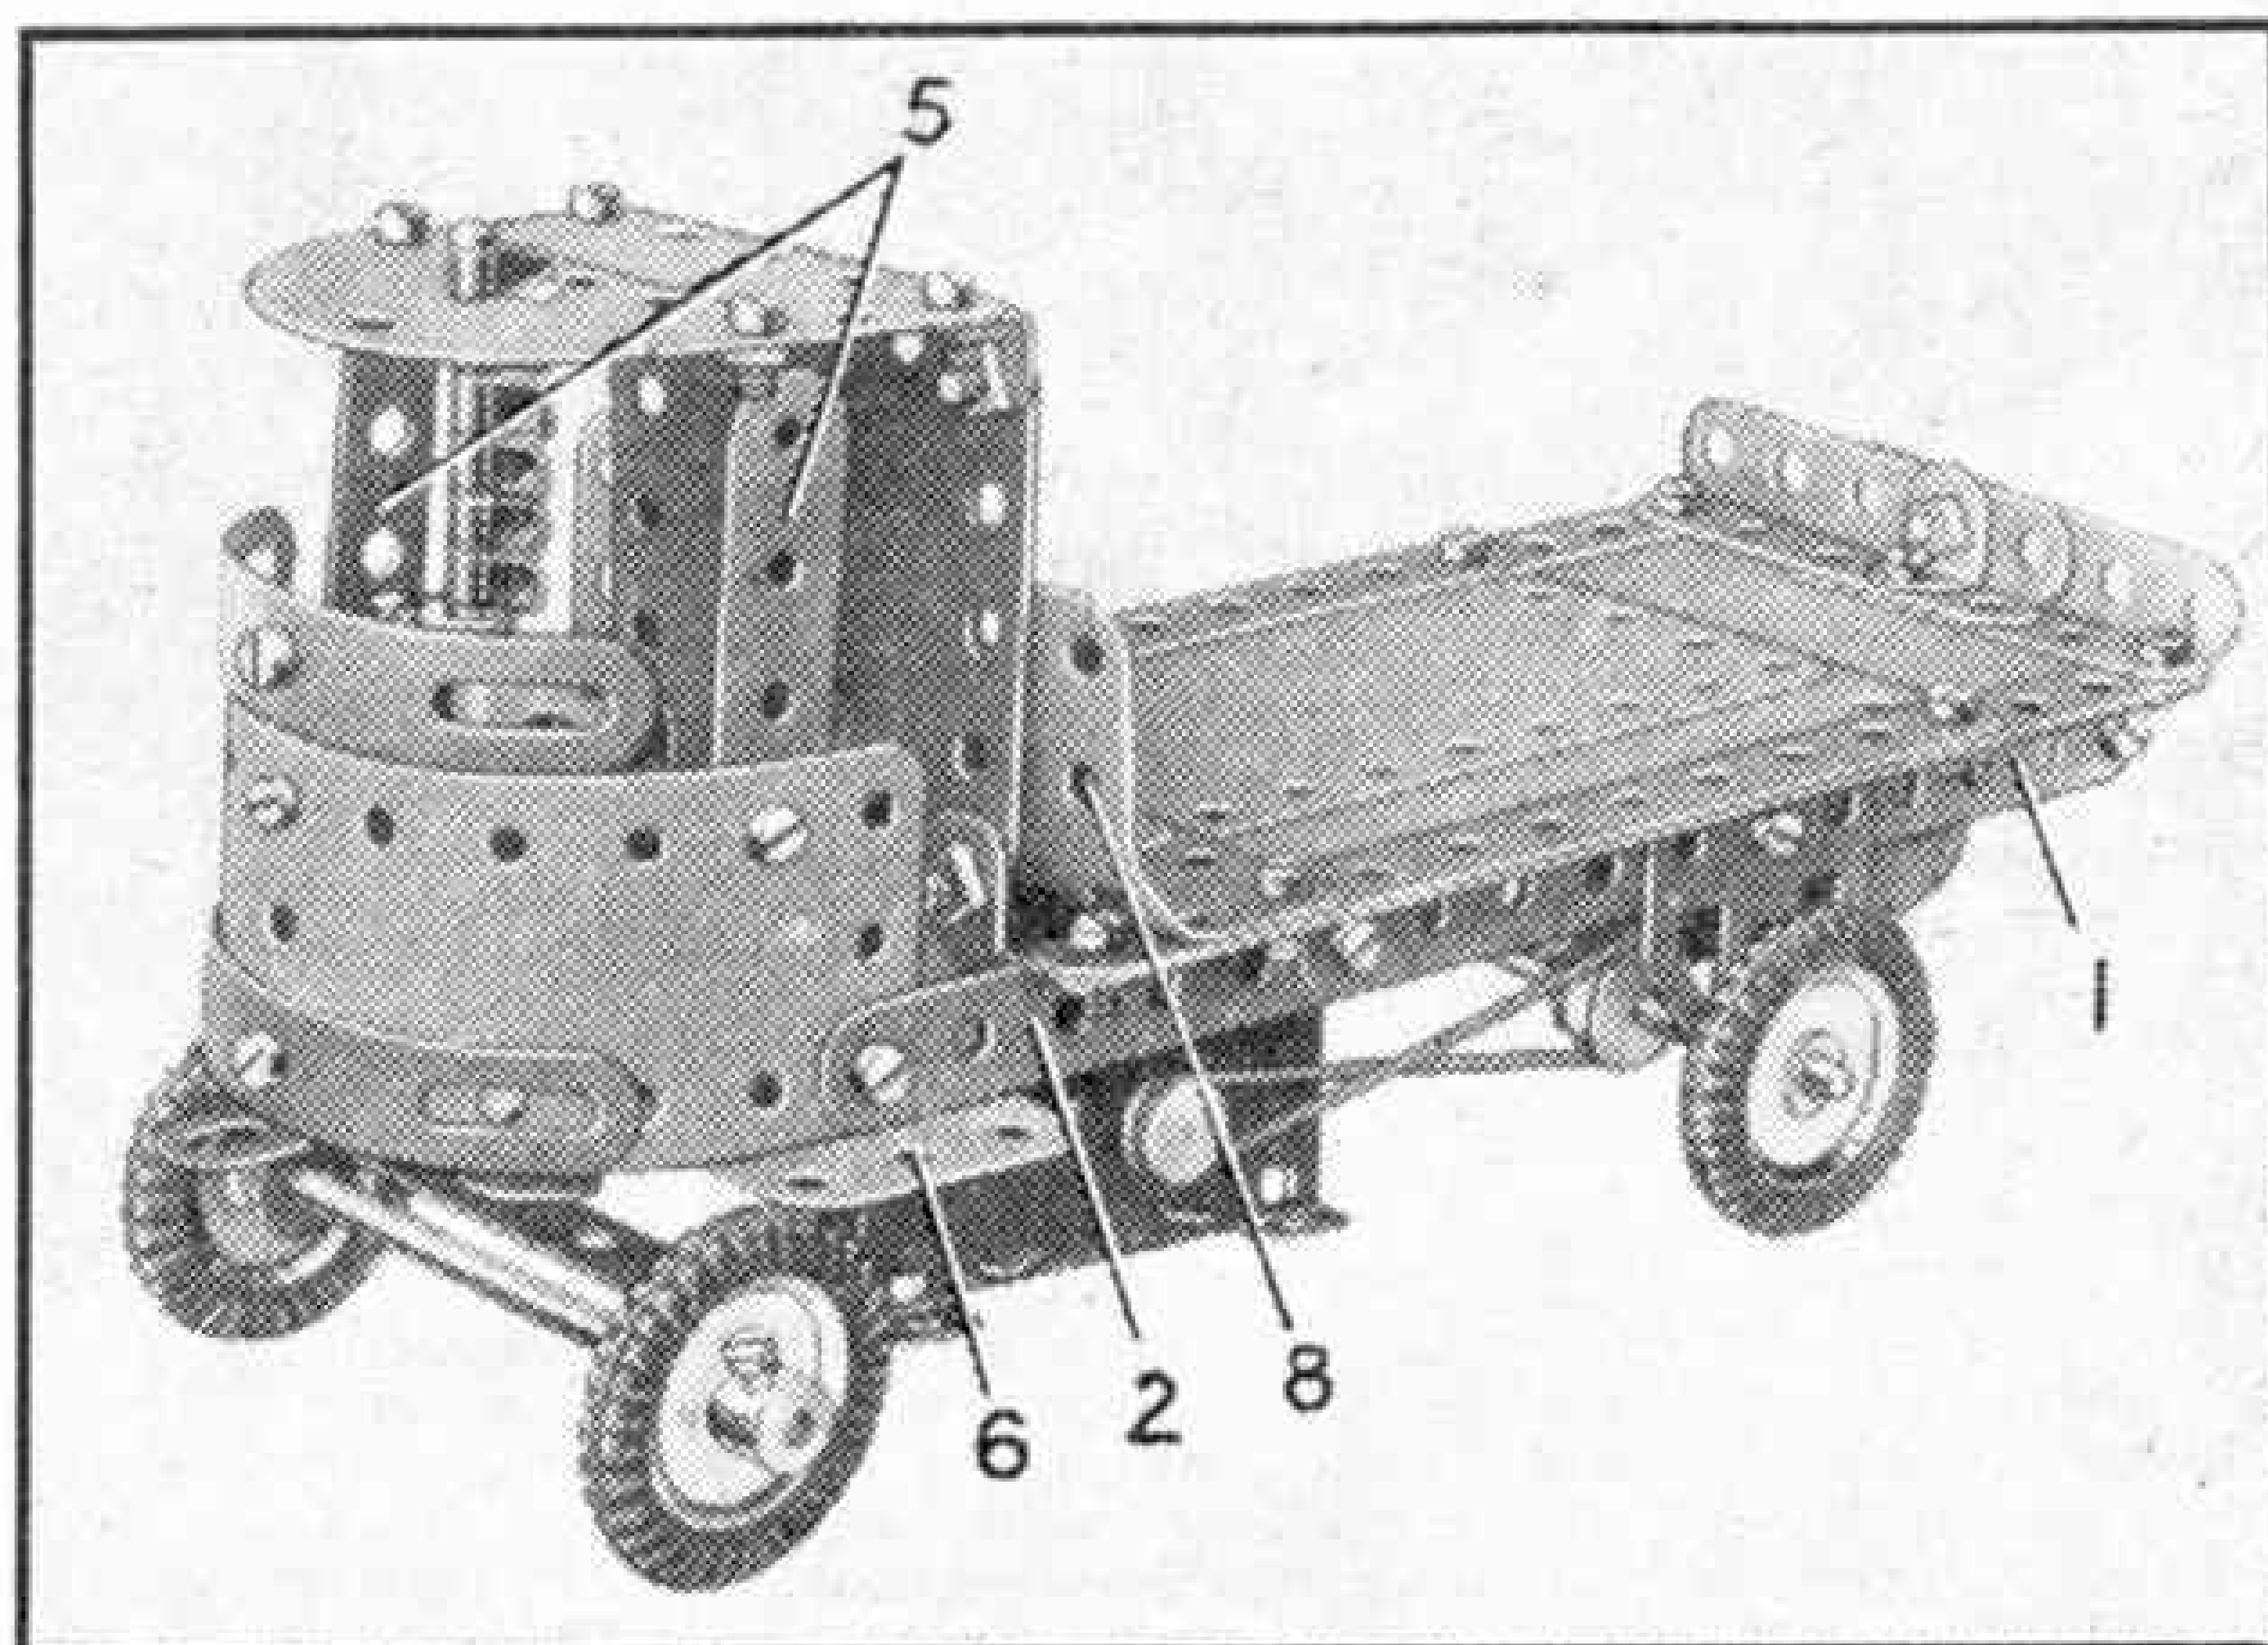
A steam lorry built from the parts in a Meccano Outfit No. 3.
